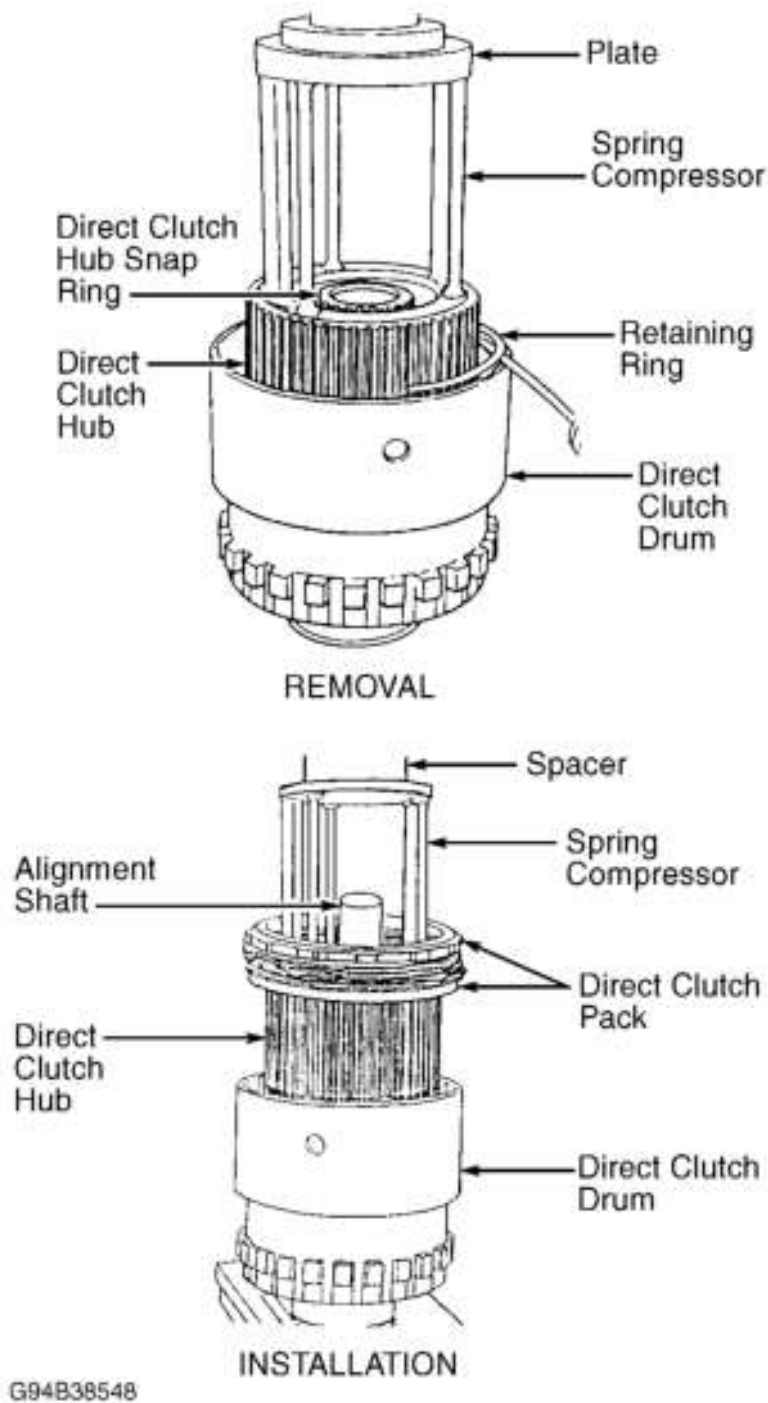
Removing & Installing Direct Clutch Hub & Direct Clutch Spring
